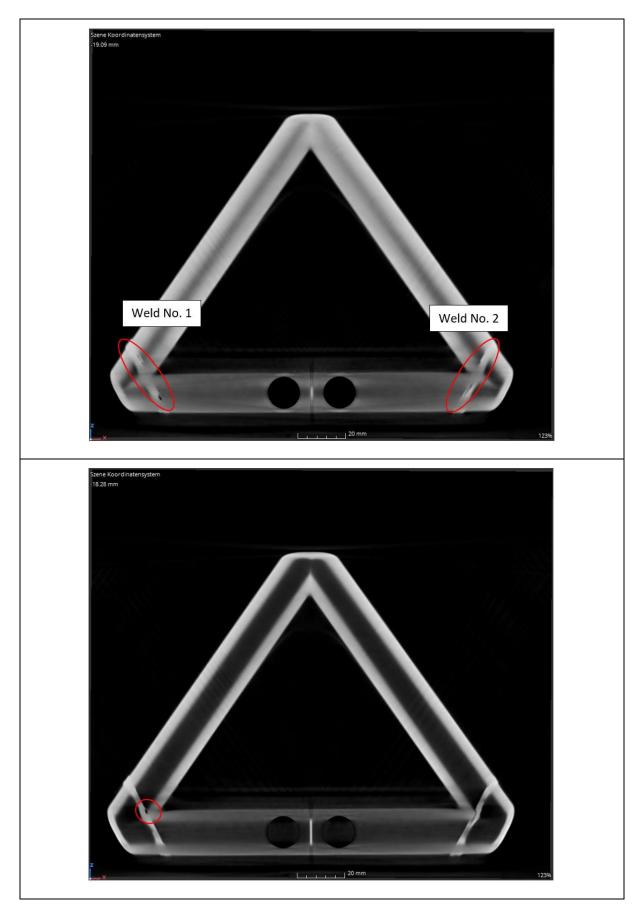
Top view of weld No.1 and No.2 picture 1-2
